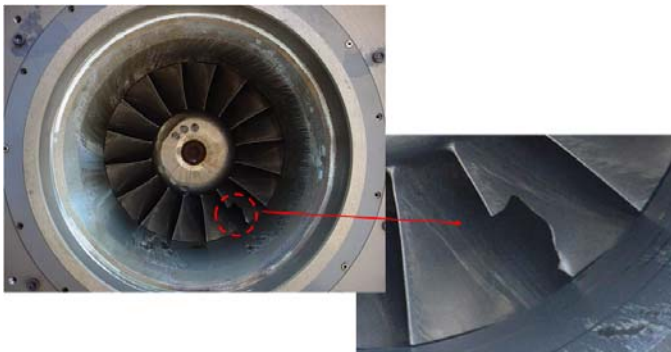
Compressor impeller blade failure after 11 hours of operation.
